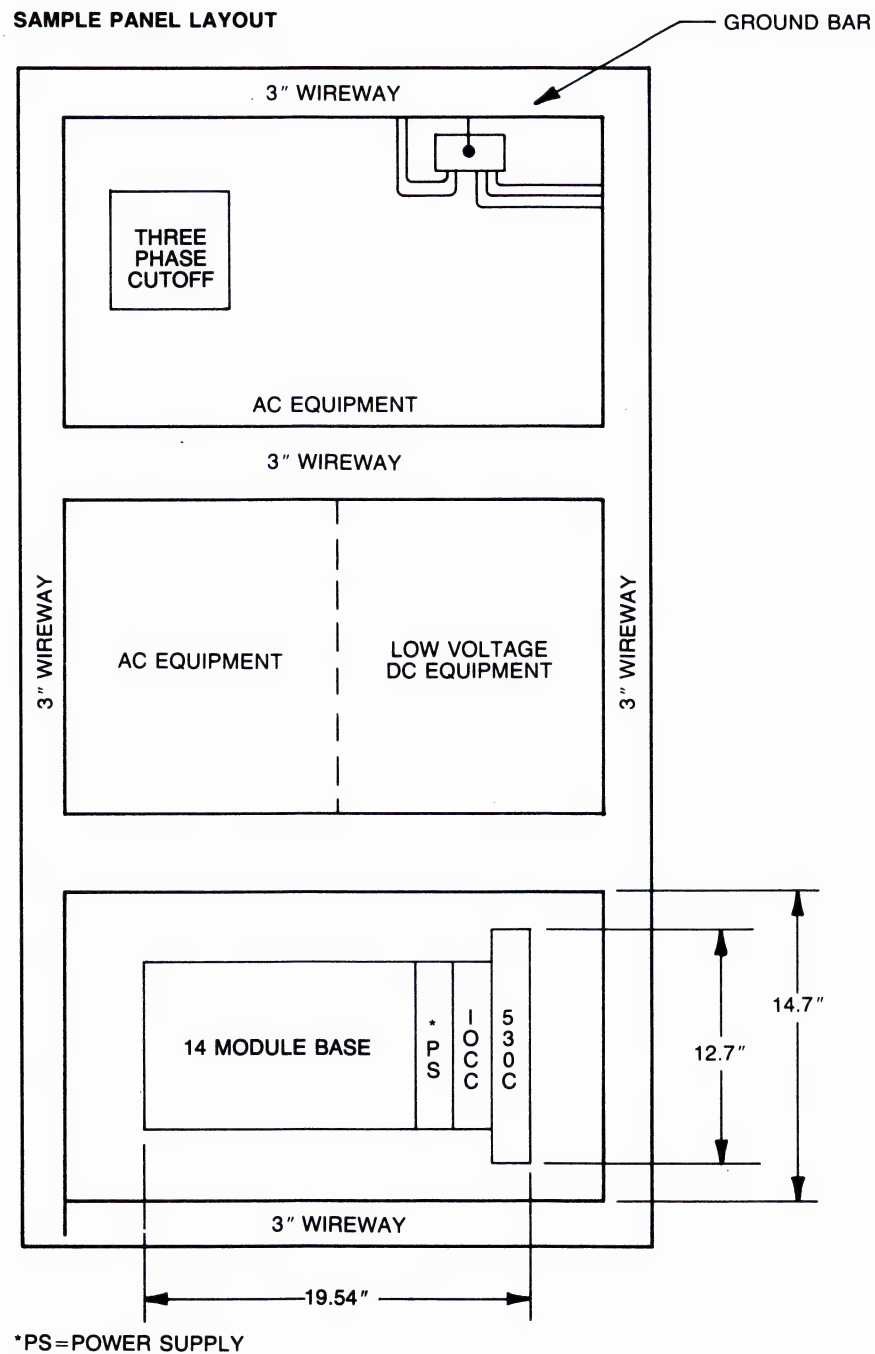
Wireway Layout for Model 500-5848 Base Assembly
